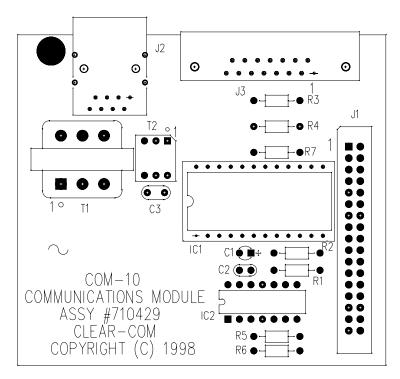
Assembly Drawing - COM-10 Communications Module Rev. A
